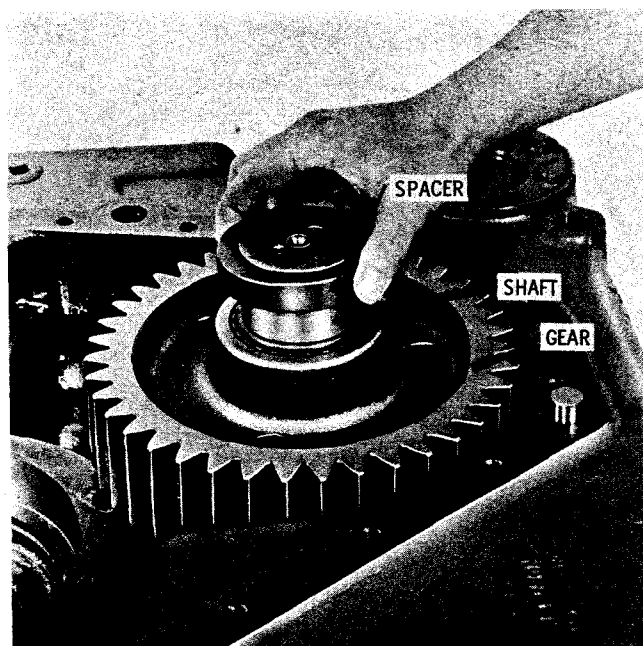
Removing spacer from rear of output shaft (models with no rear output)
